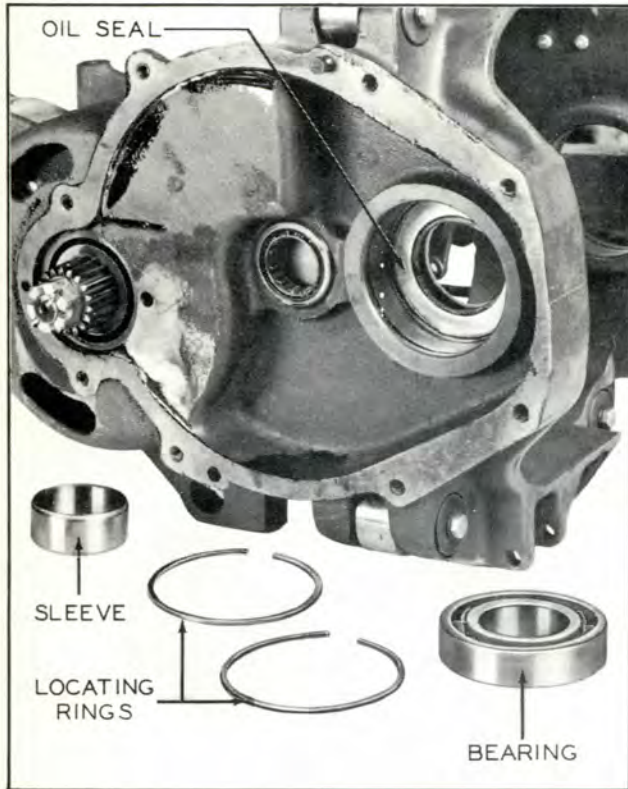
Axle Shaft Bearing and Sleeve Removal
